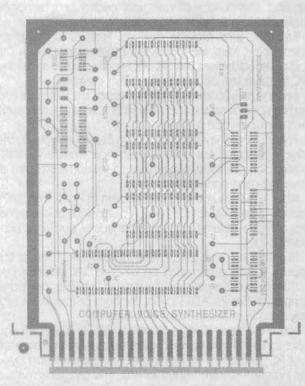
PARTS LAYOUT: Note that six jumpers must be installed on the component side of the board before installing the IC sockets. (Sockets mount over five of the six jumpers.)
